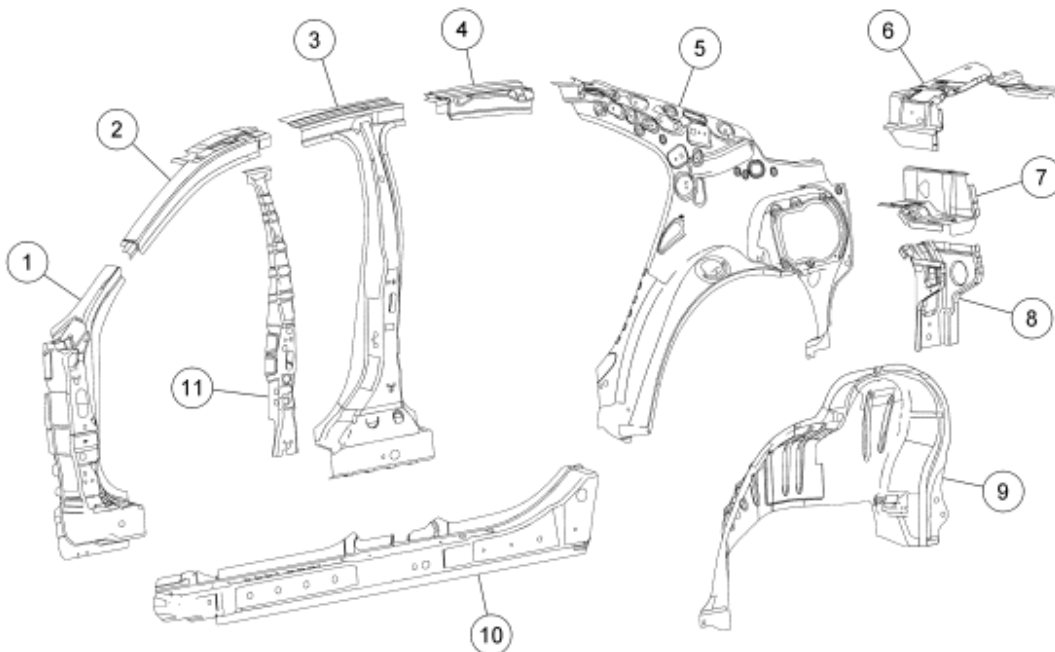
Exploded View Of Inner Body Reinforcing Panels
